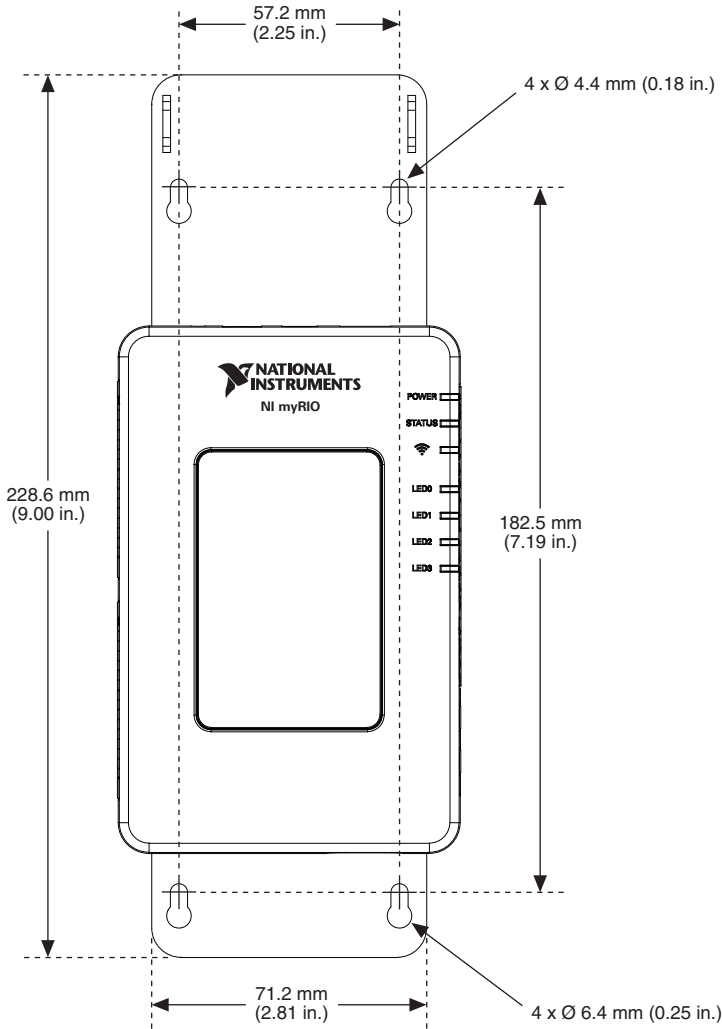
Installing the Panel Mounting Kit on the NI myRIO-1900
